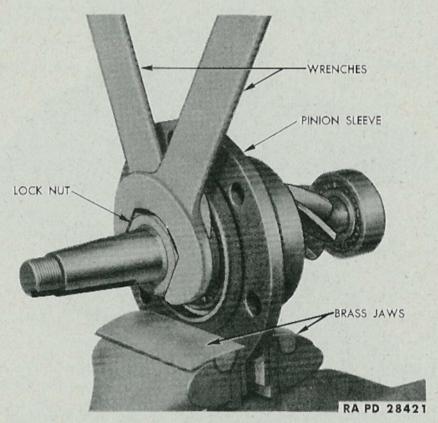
Removing Pinion Shaft Adjusting Nut and Lock Nuts with Wrench 41-W-1470-100
